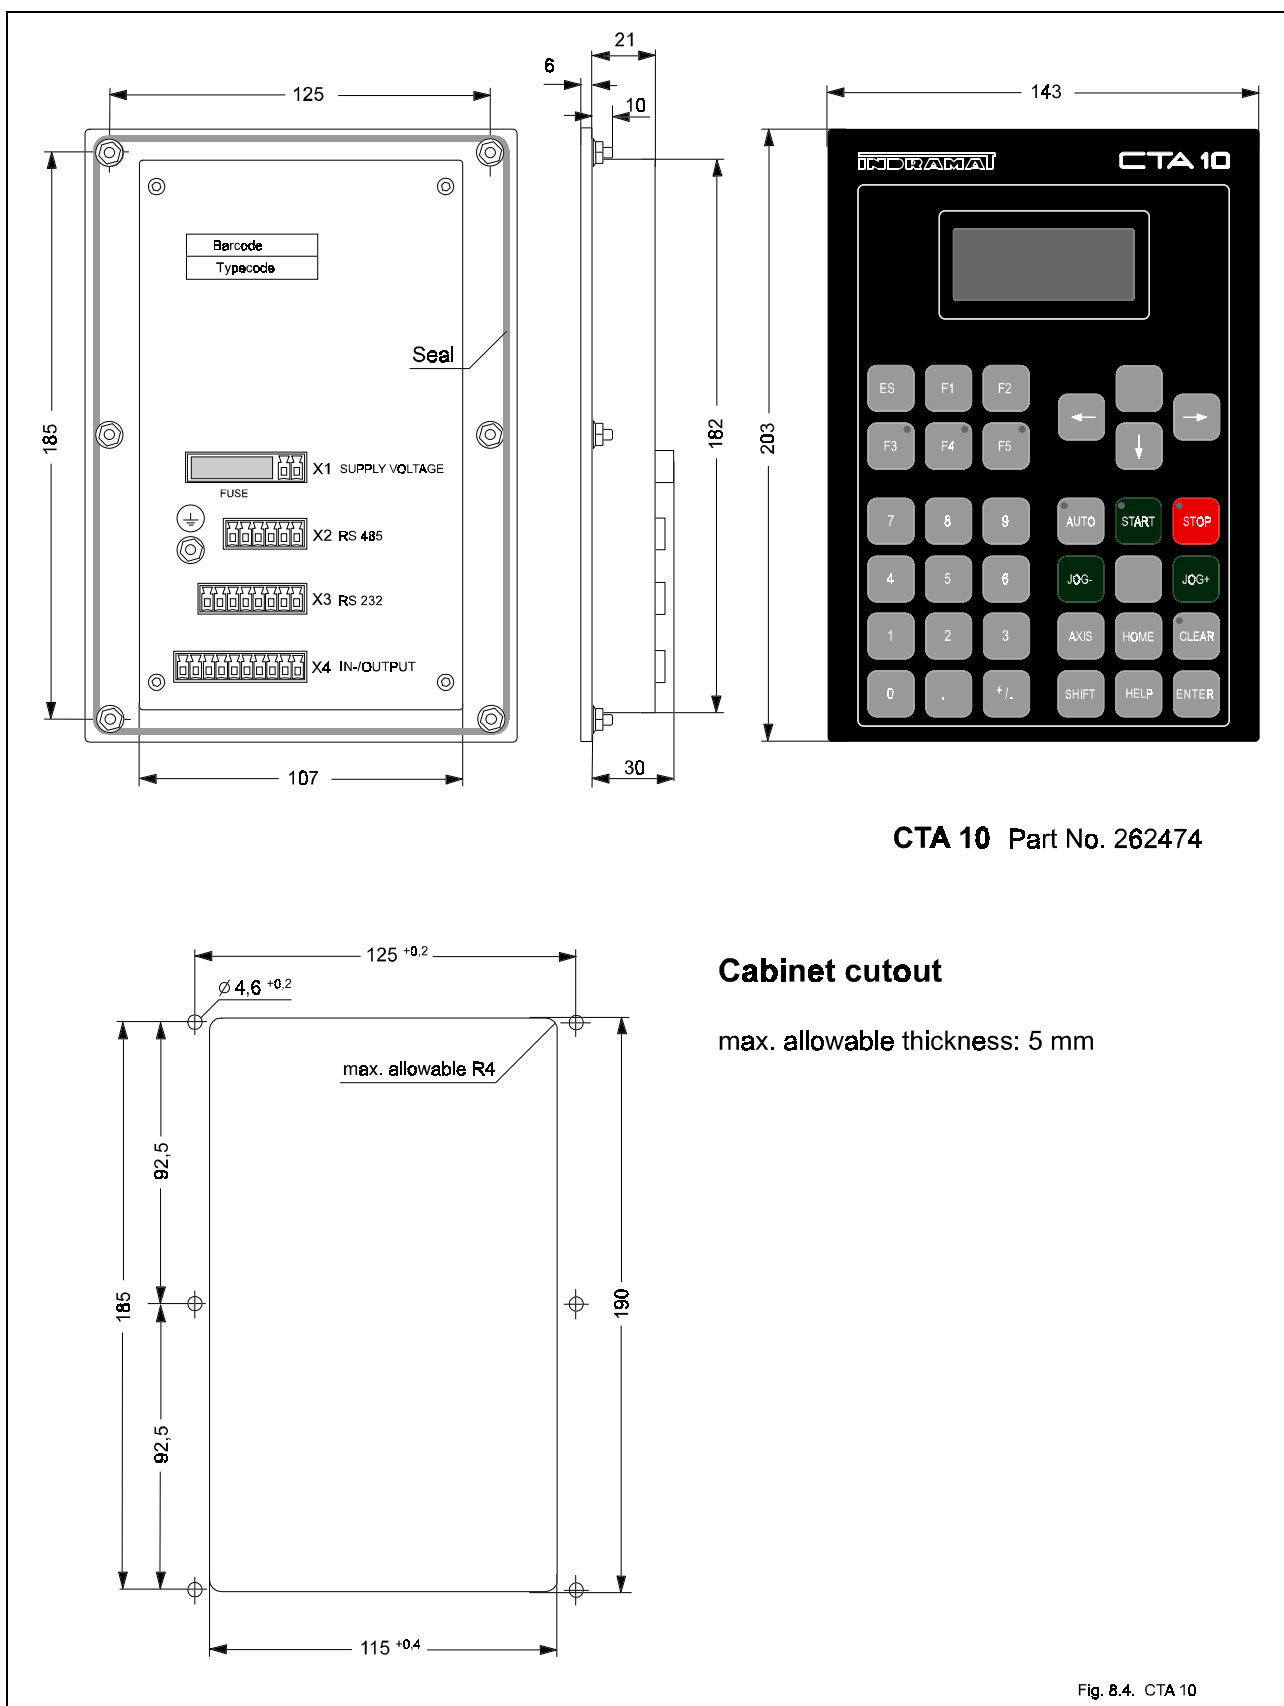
CTA 10 Keyboard and Cabinet Cutout Dimensions
